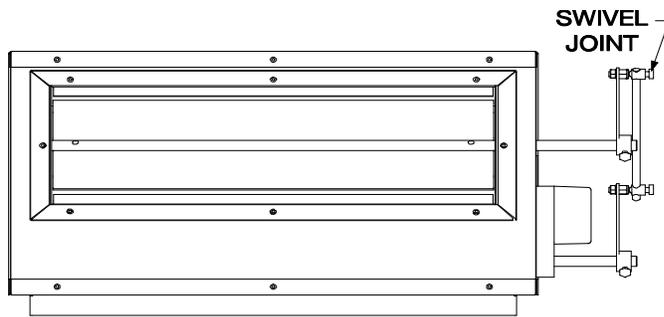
Linkage Assembly Side View (Sizes 08-12)
